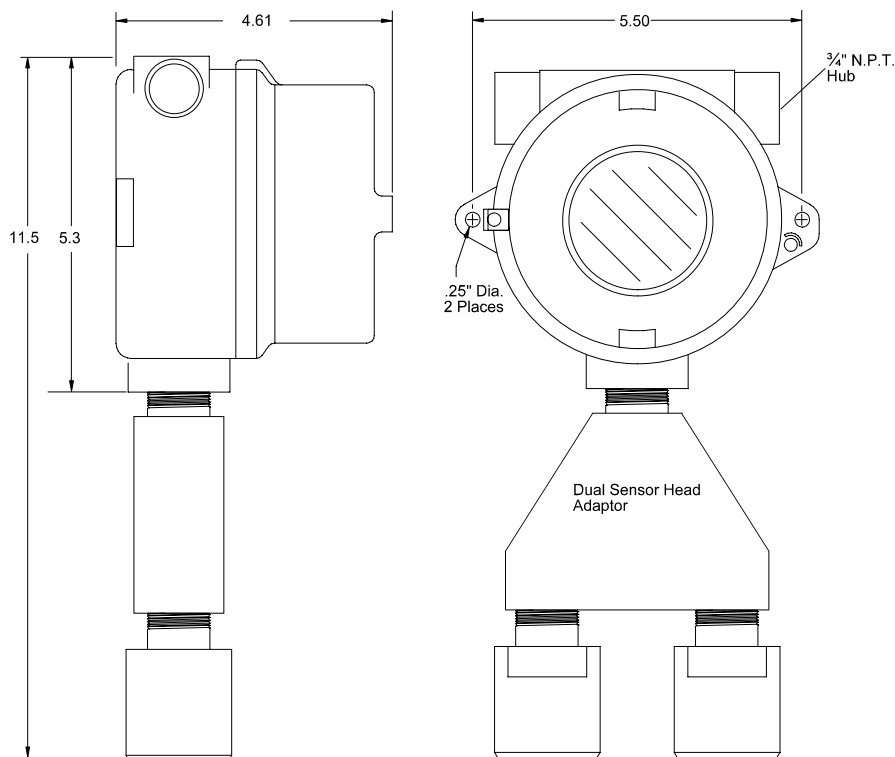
GASMAX Explosion-Proof Housing with Dual Sensor Head Adaptor
